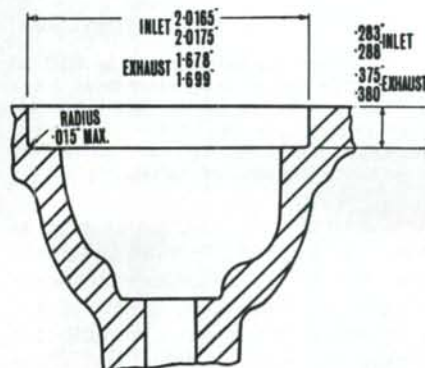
Machining dimensions for installation of service valve seat inserts on diesel models.
